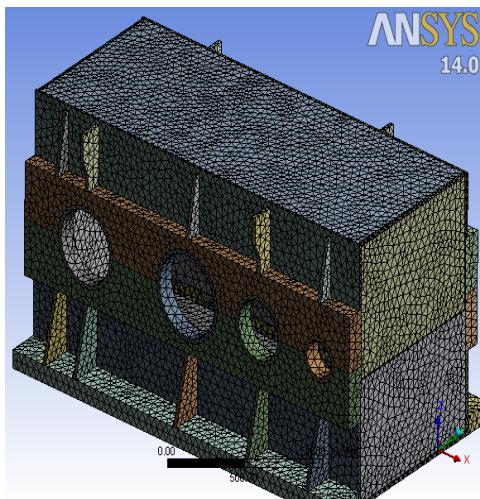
Discretized Geometry of 3 Stage Helical Gearbox Casing (Meshing)
